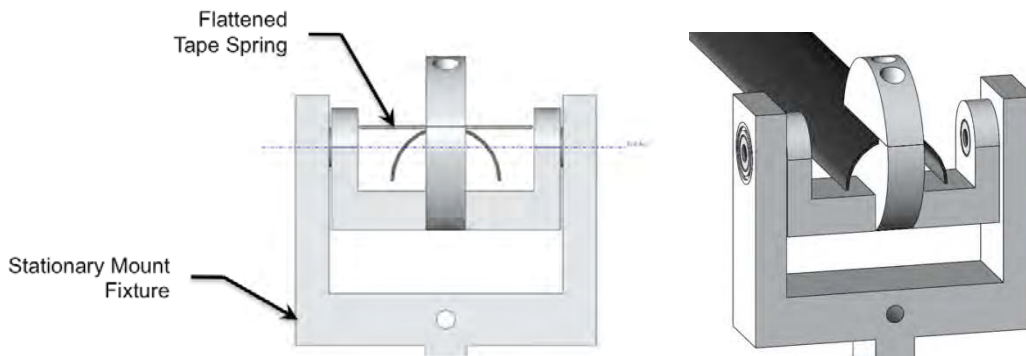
Tape spring hub mechanism design concept requires no clearance trimming
